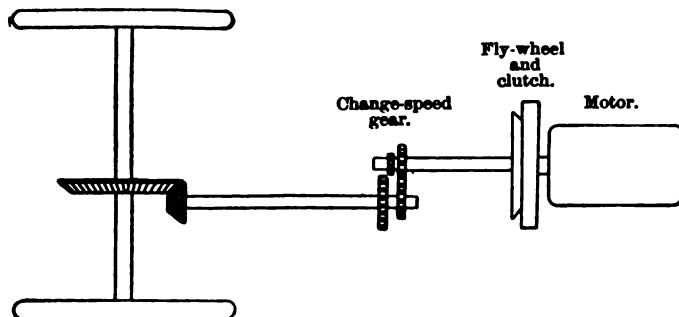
TRANSMISSION BY SHAFT TO LIVE REAR AXLE.
